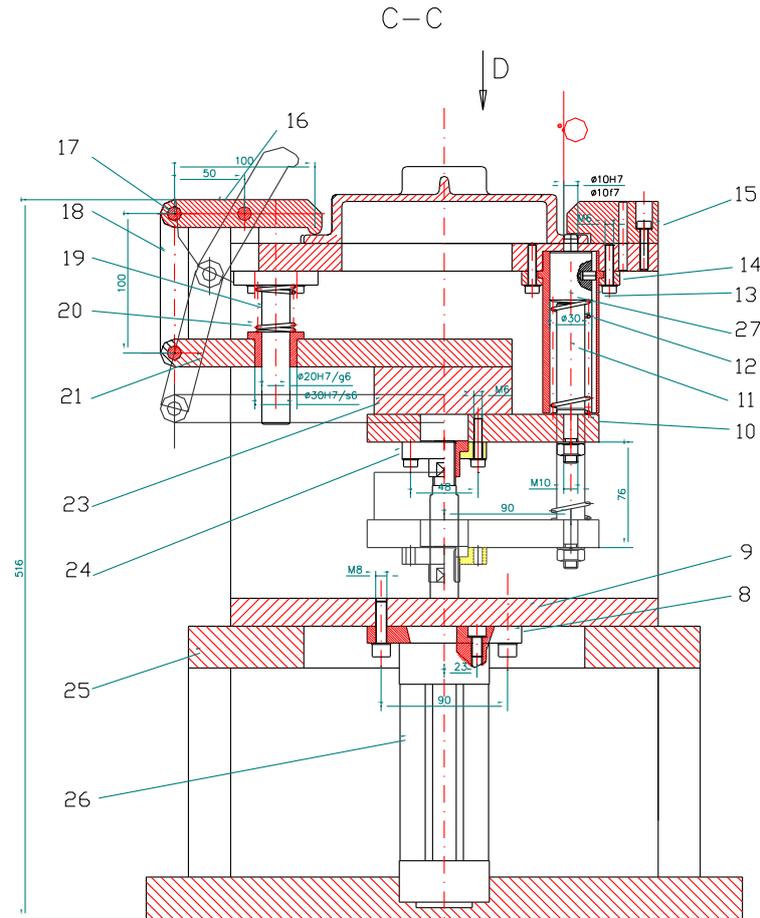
2D Model of the pneumatic operated with levers guidance and fixing device assembly. C-C Section
